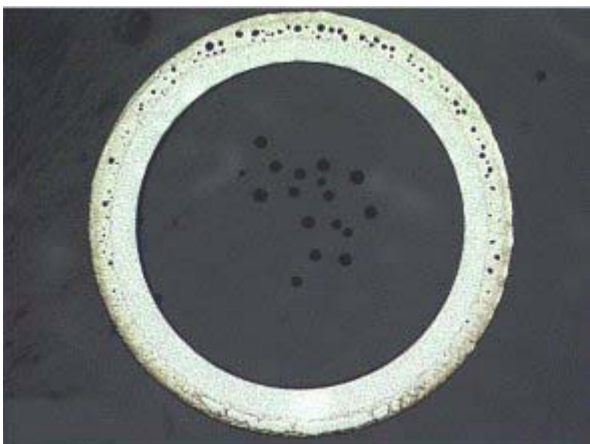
Porosity in cross-sectional sample of a laser weld.
